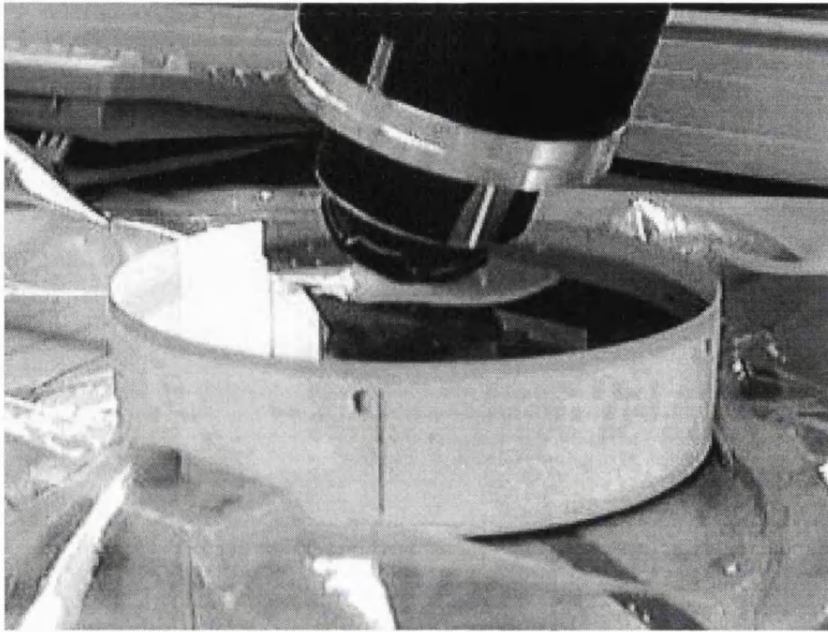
Tilted spinning compliant tool (68.9 kPa) in contact with the abrasive slurry (Regipol 788) on the workpiece
